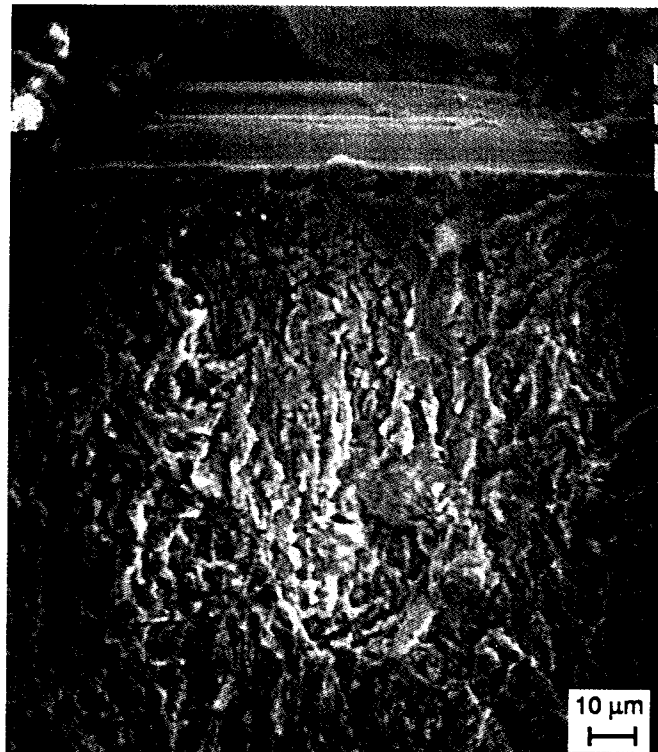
Macroscopic Appearance of Fracture Surface
